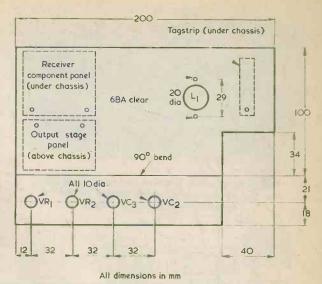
The chassis, also made in aluminium sheet, has the dimensions given here. Also shown are the positions taken up by the receiver component panel and the output stage panel
